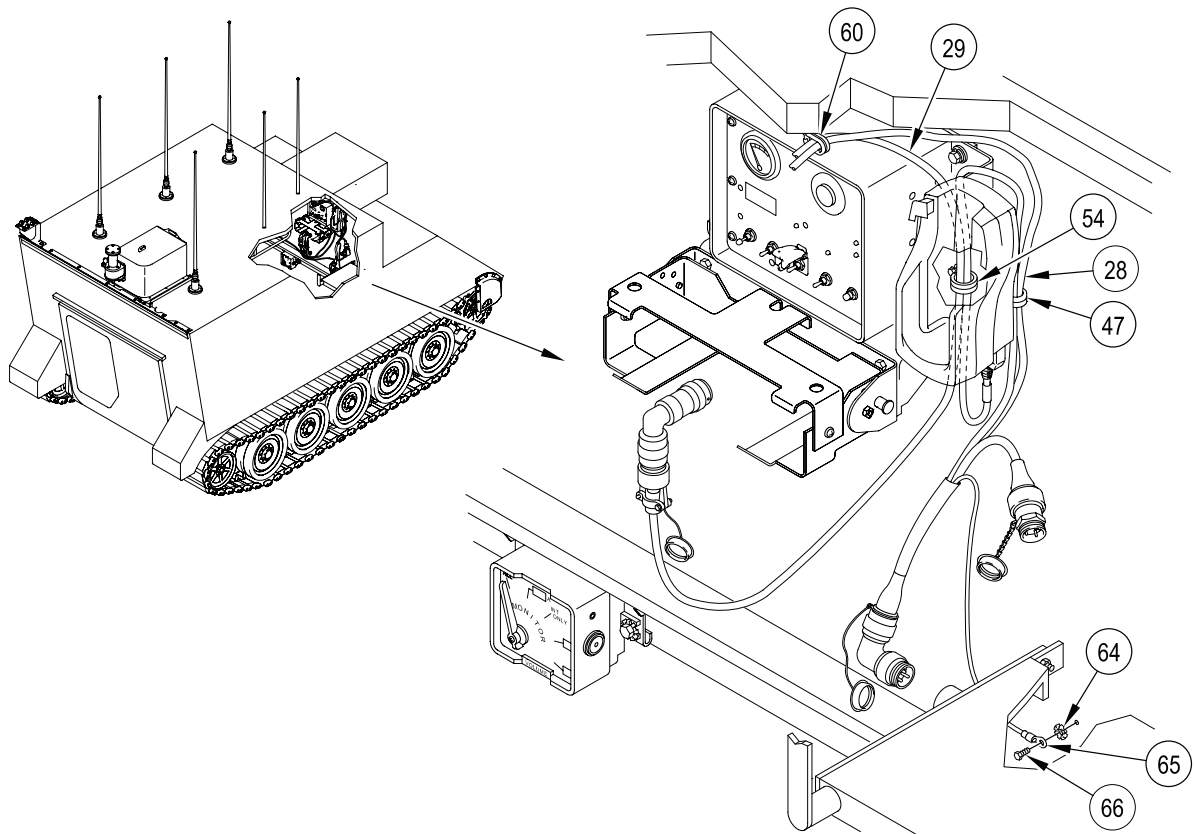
RCU Cable, Power Harness, and RCU to PDA Cable Installation (M1068A3 Only)
